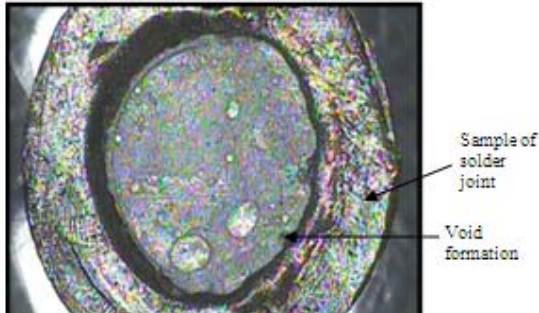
Surface fracture of Sn-25Ag-10Sb solder joint soldered at temperature of 435 °C with no thermal aging treatment.
